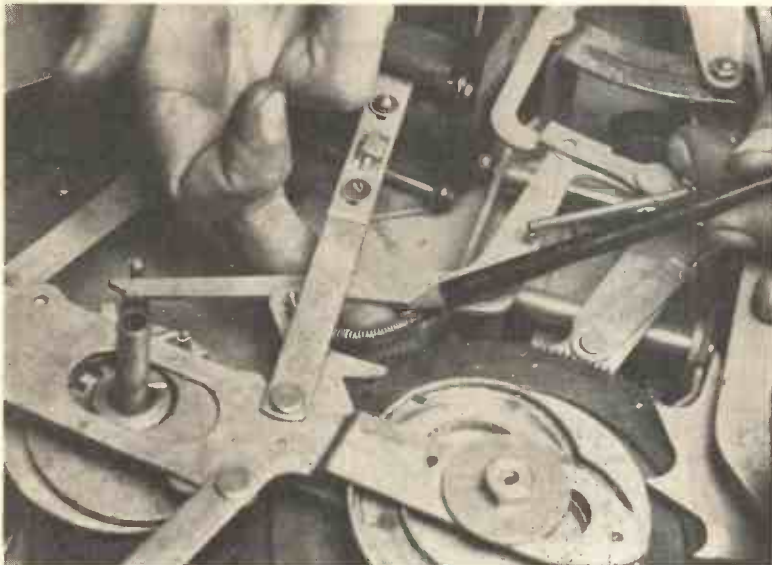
THE COMBINED CLUTCH TRIP LEVER AND HOLD-OFF LEVER SPRING.
